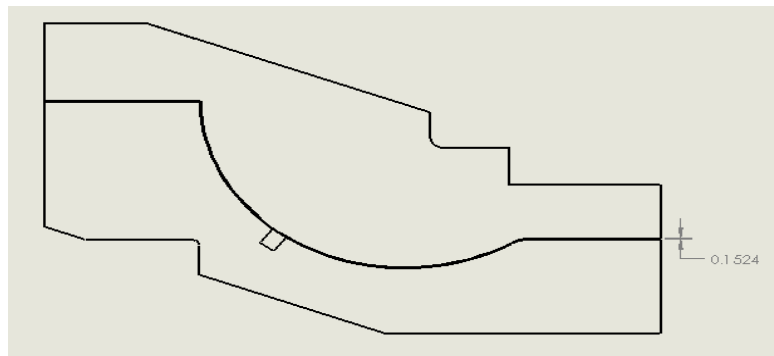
Lower part of the top foil forming jig showing orifice tube slot and locating shims
